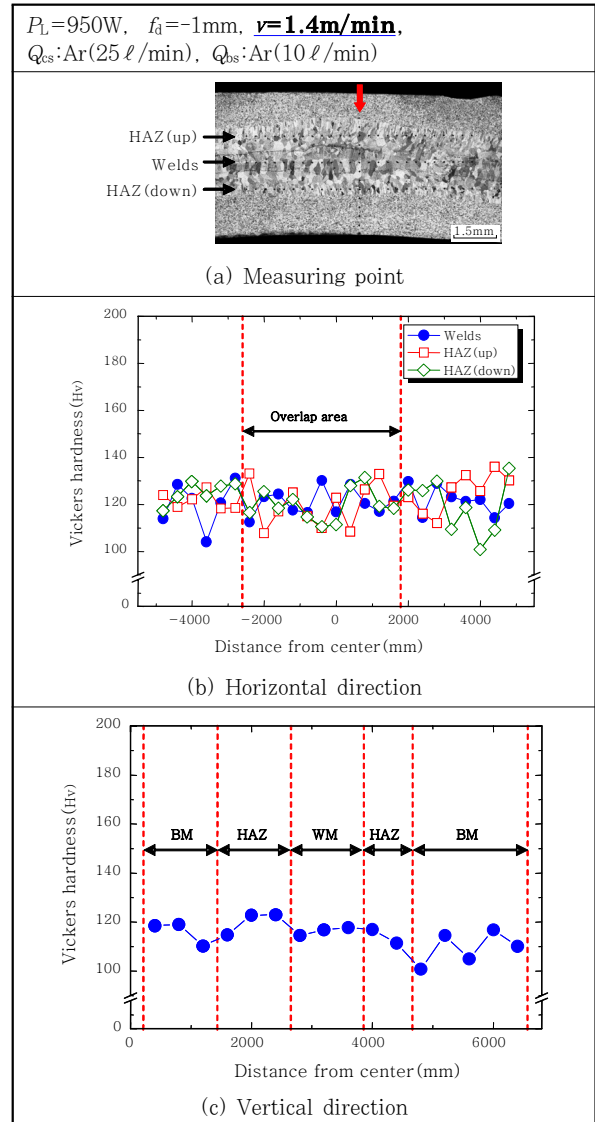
Hardness of lap weldment for heat exchanger (location A)
